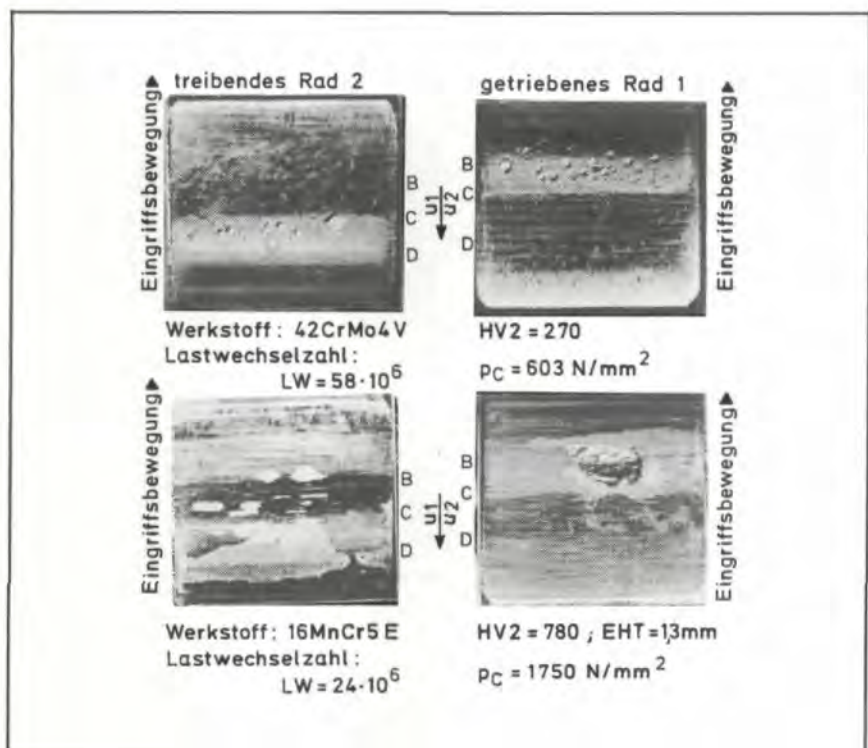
Pitting damaged tooth flanks. Application conditions:  $a = 200$  mm;  $m = 9$  mm;  $z_1/z_2 = 21/22$ ; injection lubrication using mineral oil;  $v_t = 11.5$  m/s.
